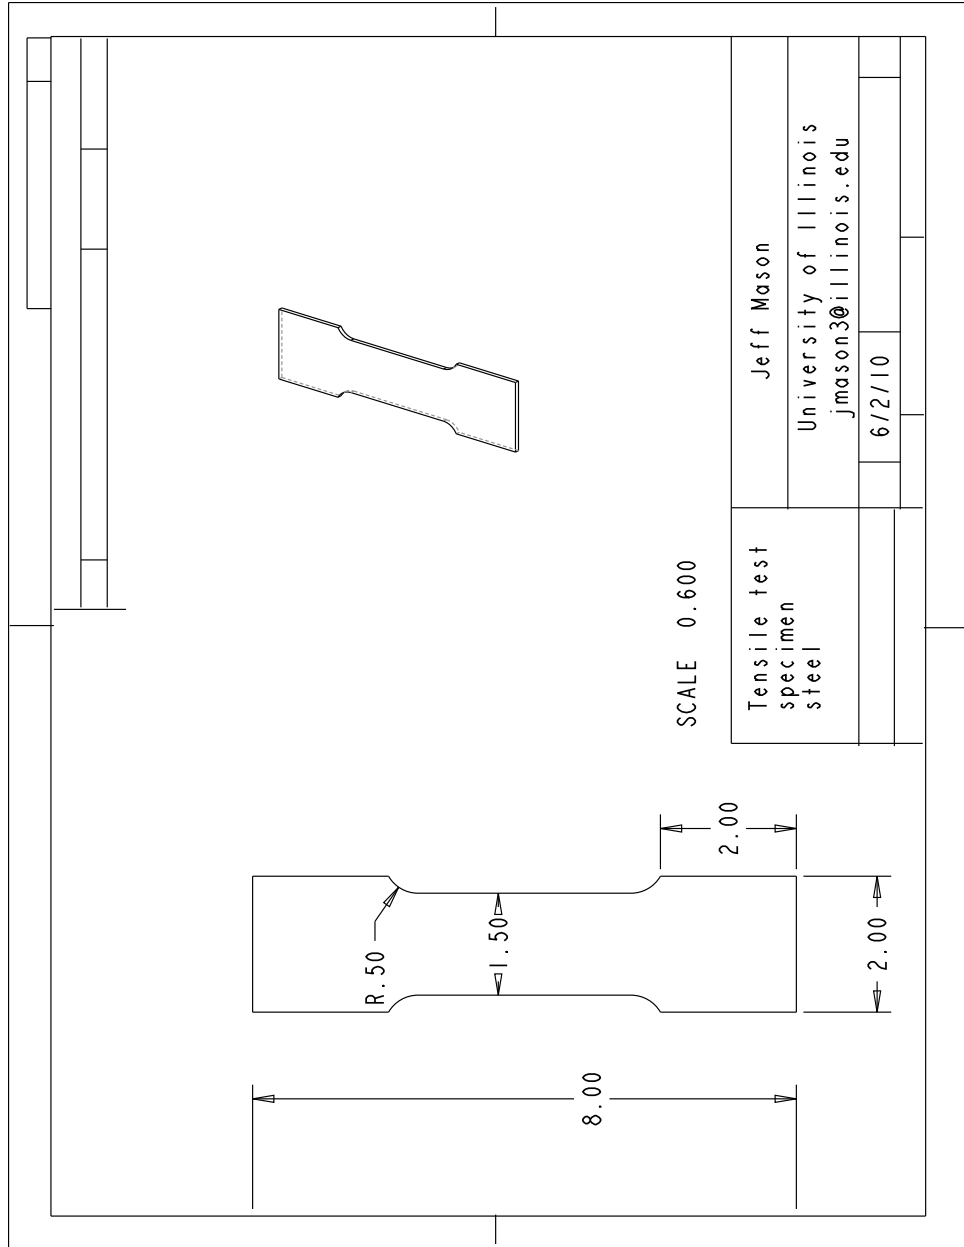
Tensile specimen design used to test target plate material for 50.75 mm diameter liners
